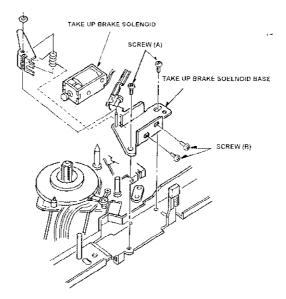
Removal of Take Up Brake Solrnoid
